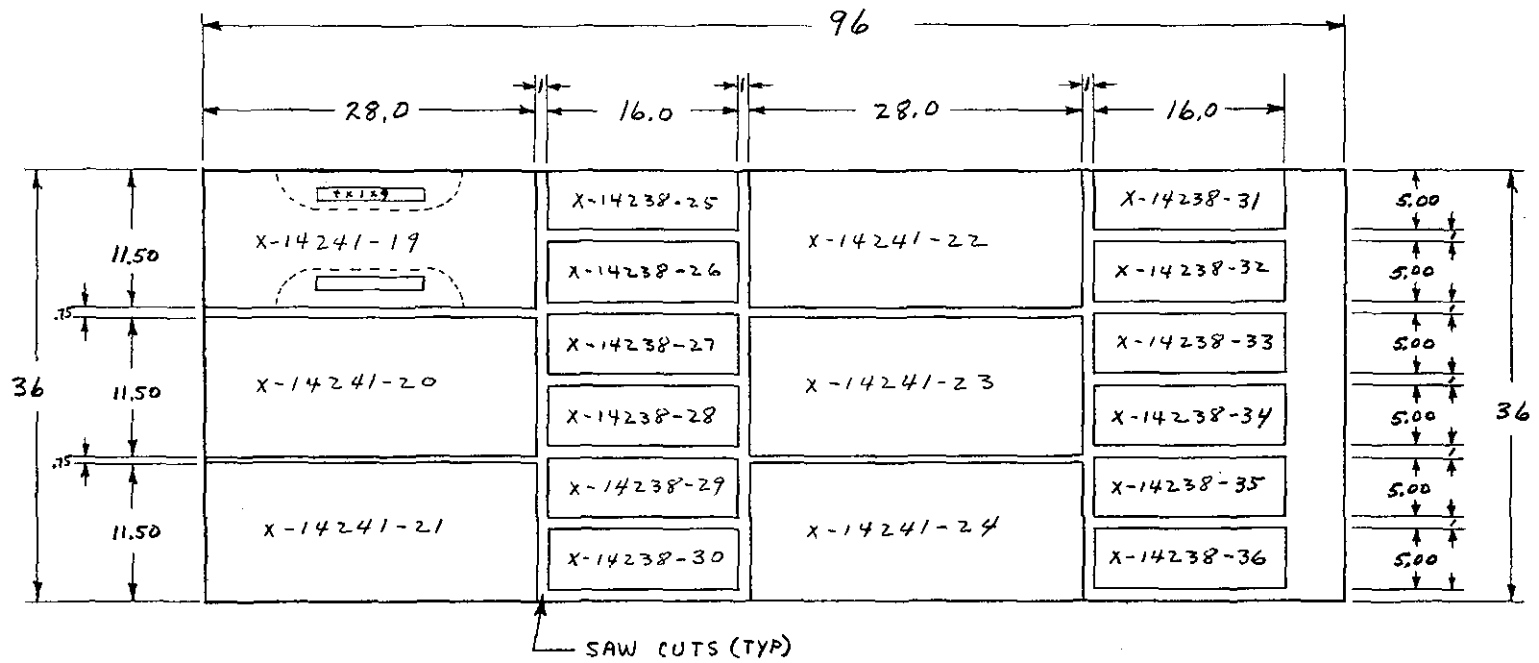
Specimen Blank Lay-Out for 3/8-Inch Thick 300 M Steel, HT 3922452
